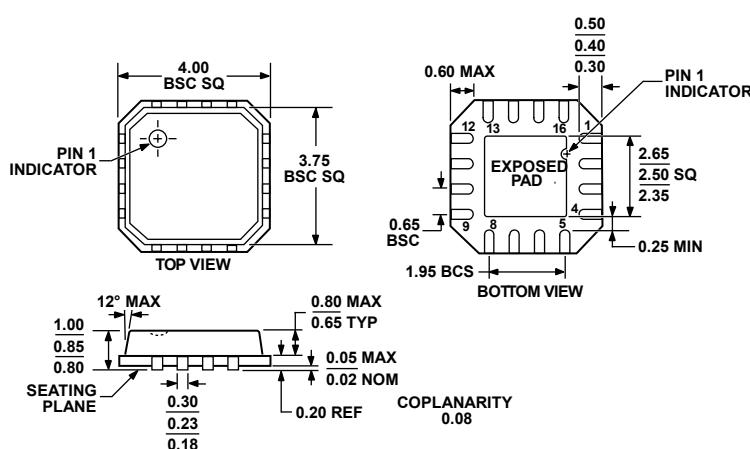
16-Lead Lead Frame Chip Scale Package [LFCSP\_VQ]
